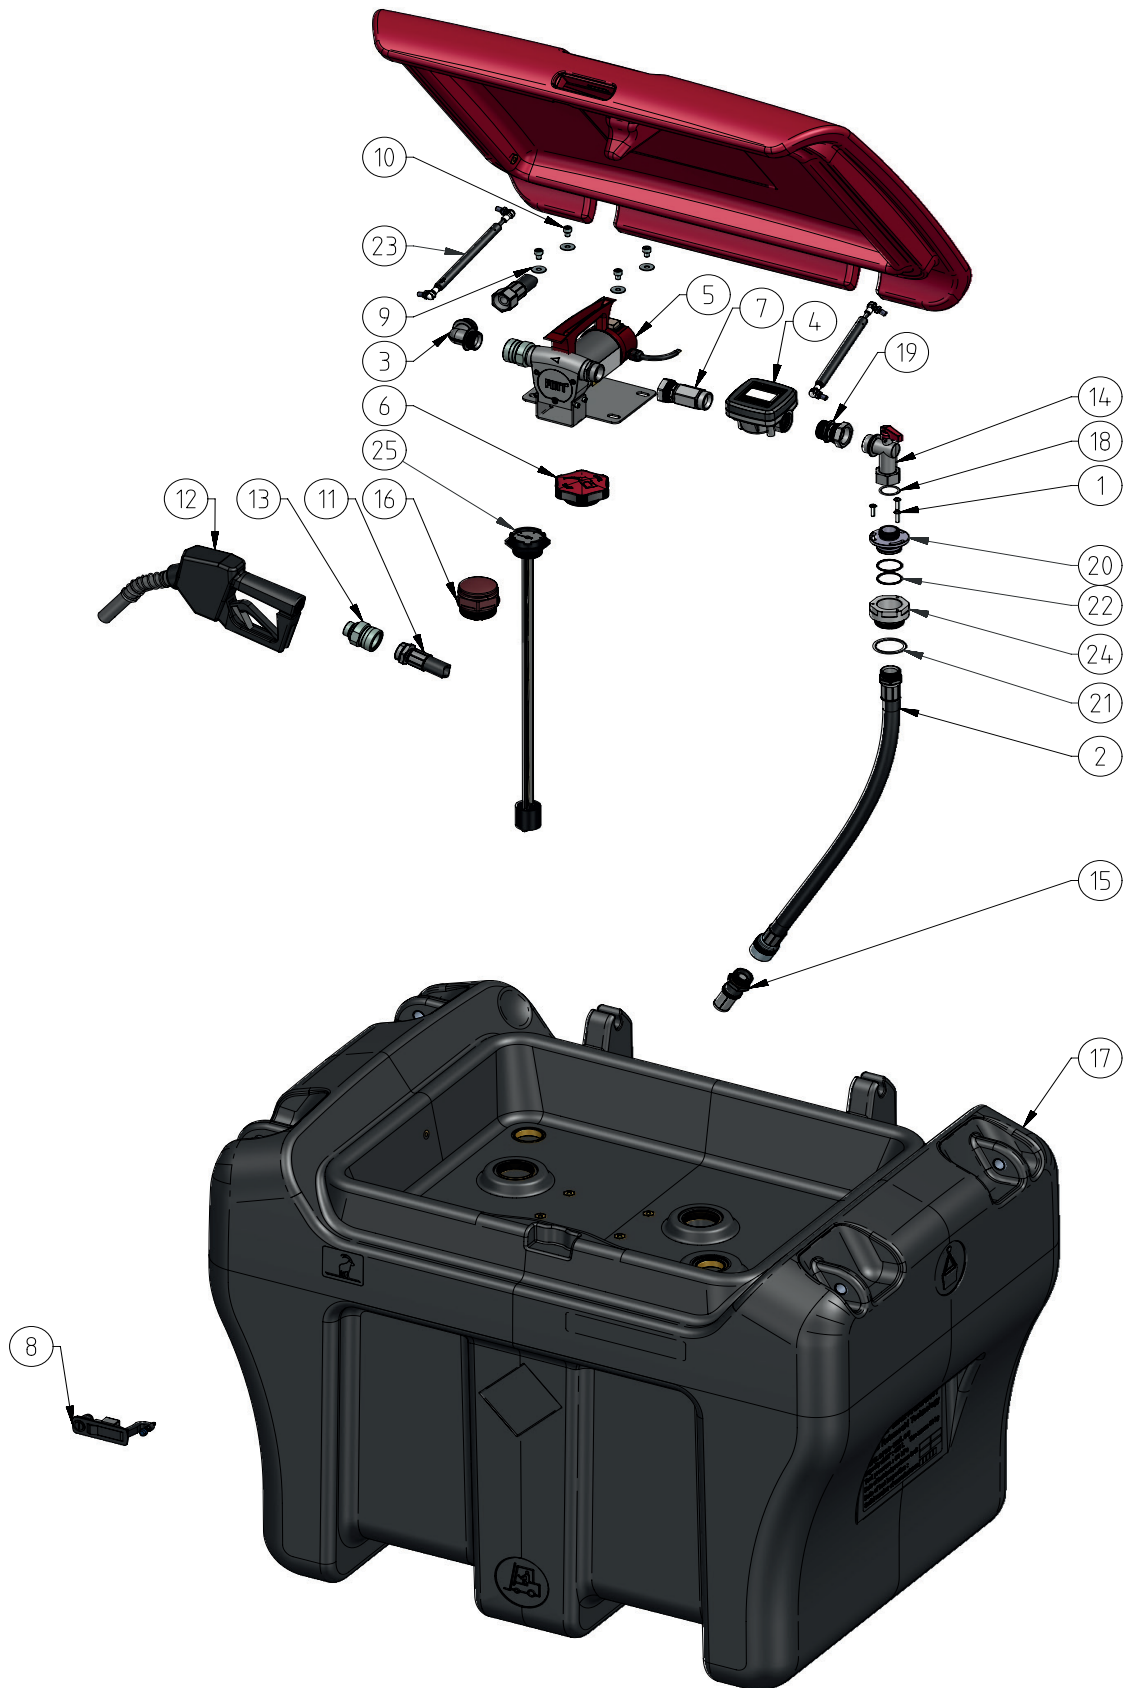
1: Exploded view mobiMASTER-54 l/min
